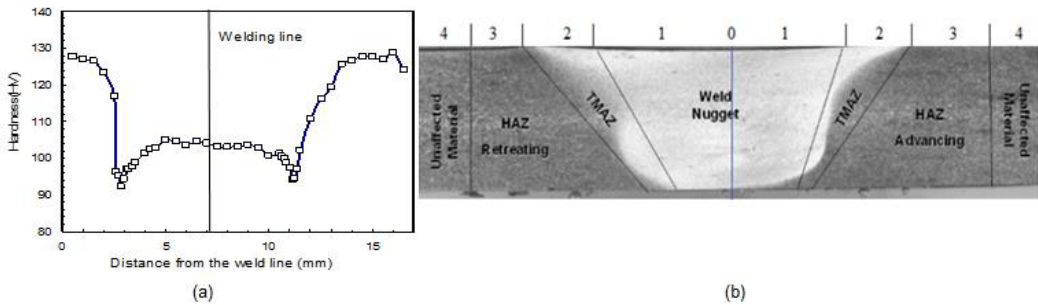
(a) Vickers hardness transverse across the friction stir welded 2024-T4 aluminum alloy joint at various positions in the section. (b) Different FS Weld Zones affected by weld too during FS welding.
